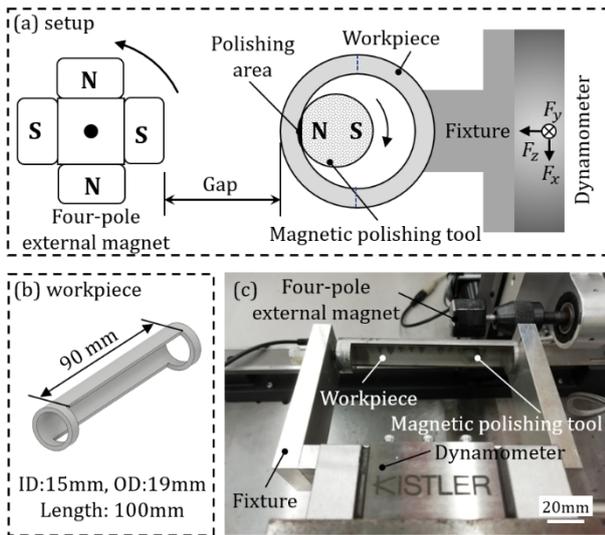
Polishing setup (a) schematic diagram, (b) actual setup and (c) AISI 316 stainless steel workpiece
